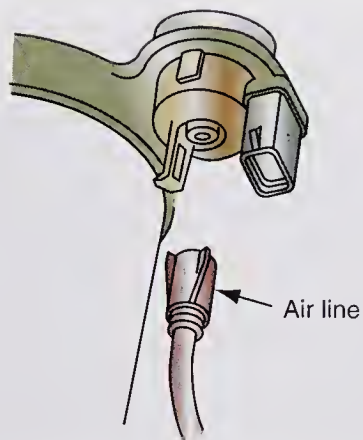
Disconnecting the air line from the air spring solenoid valve.
